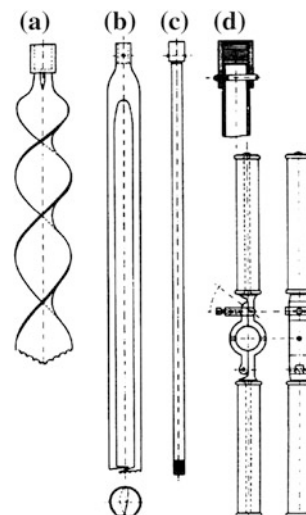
Drilling tools used by von Drygalski (1904): a auger; b spoon-borer; c drill pipe with threaded connection; d wrench
